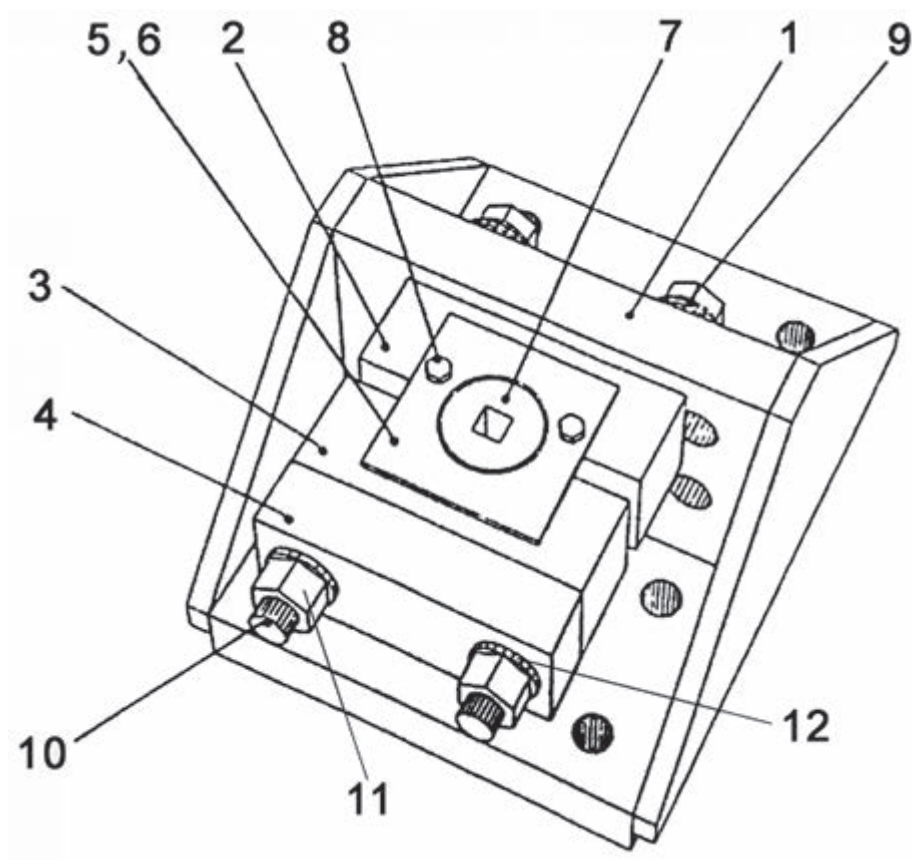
Brake device, large — For machines with shaft sizes 20 mm, 25 mm and 40 mm
